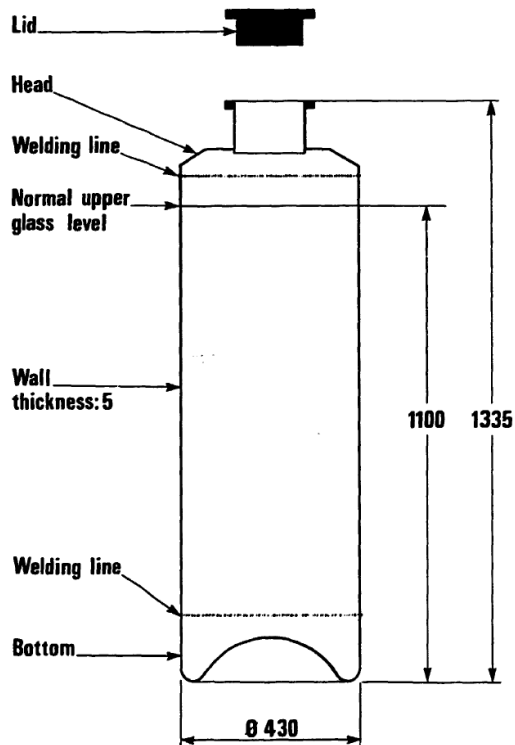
CSD-V canister (all dimensions in mm) /SOM 85/
